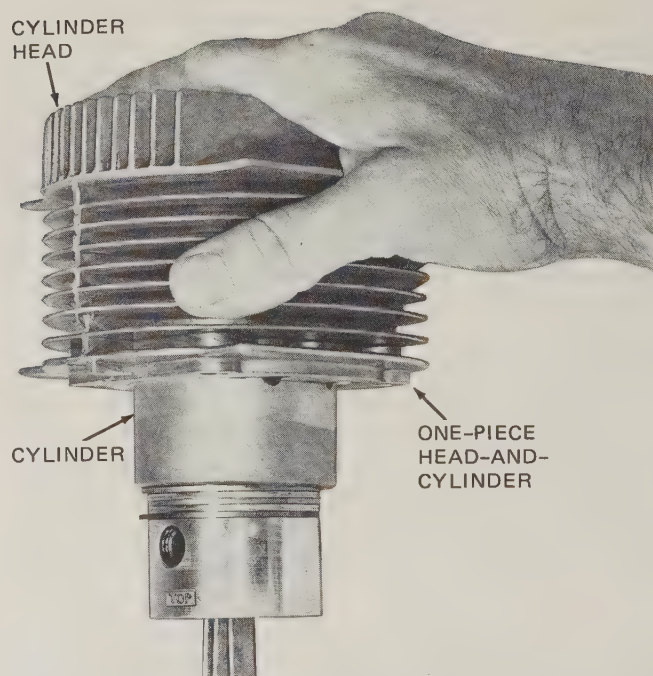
Removing the one-piece type of cylinder-and-head assembly from the piston. (Lawn Boy Division of Outboard Marine Corporation)
